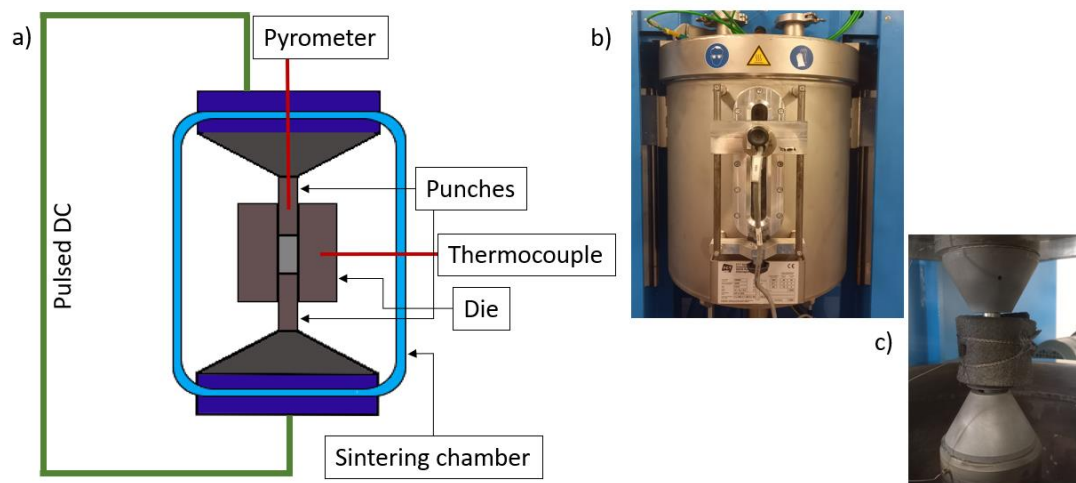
a – general schematics of sintering chamber of SPS machine; b – sintering chamber of SPS HP D25 FCT used for experiments; c – sample loading unit of the used SPS machine
